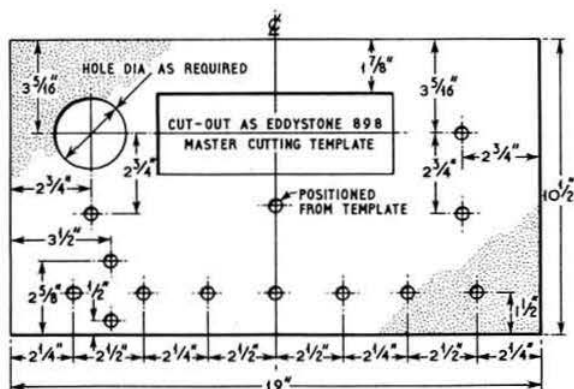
The panel layout. In order to eliminate undue panel flexing, it is cut from ⅛ in. thick aluminium alloy. A template is supplied with every Eddystone 898 dial to ensure that the mounting holes and the rectangular cut-out are accurately positioned.
